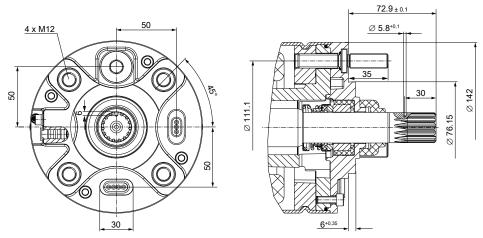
UMA 150, UMA-S 150 mating dimensions in [mm]
